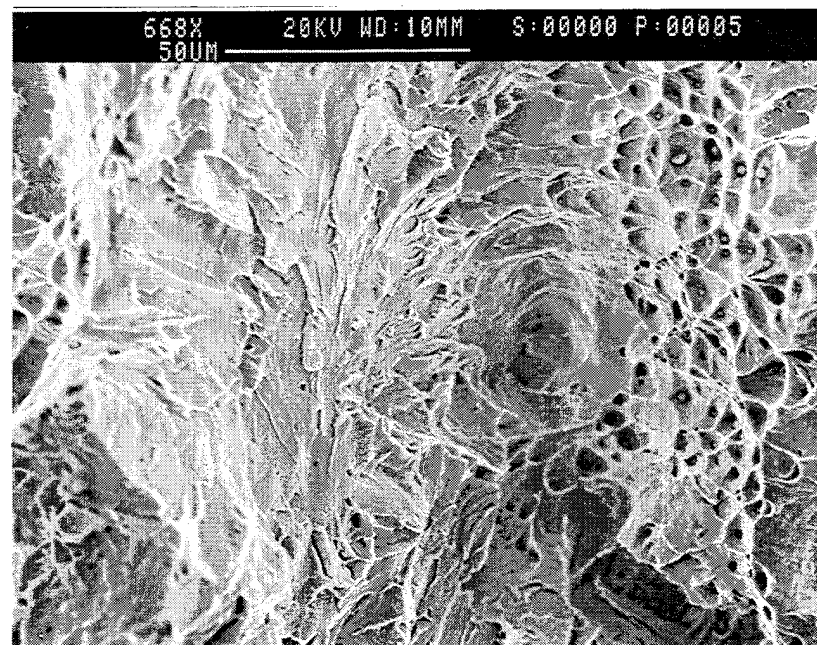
MV20 - GTA Weld Using C5 Cover Gas Showing Cleavage and Ductile Areas Nucleated by Inclusions
